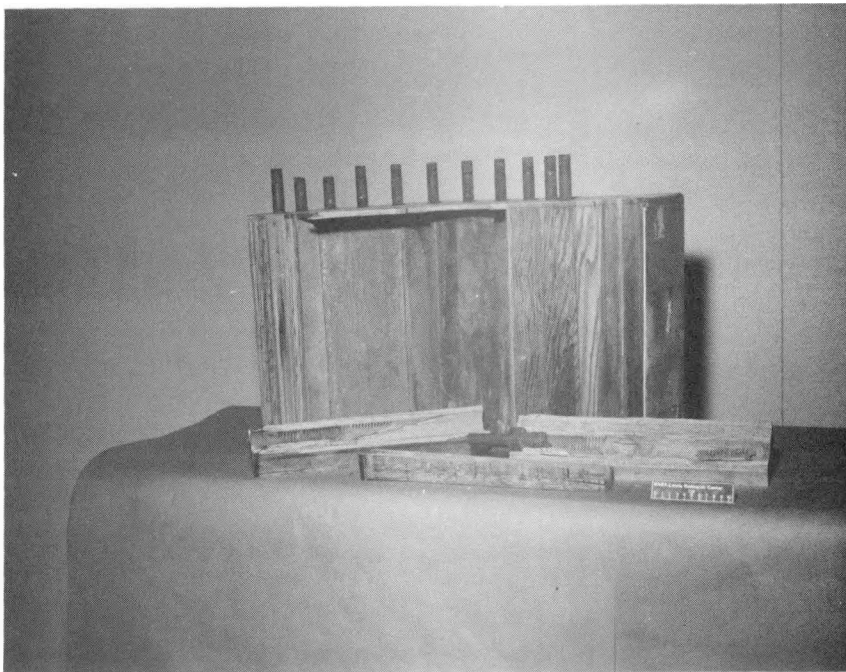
Root end of sectioned 20 foot blade showing broken studs and integrity of wood laminate.
